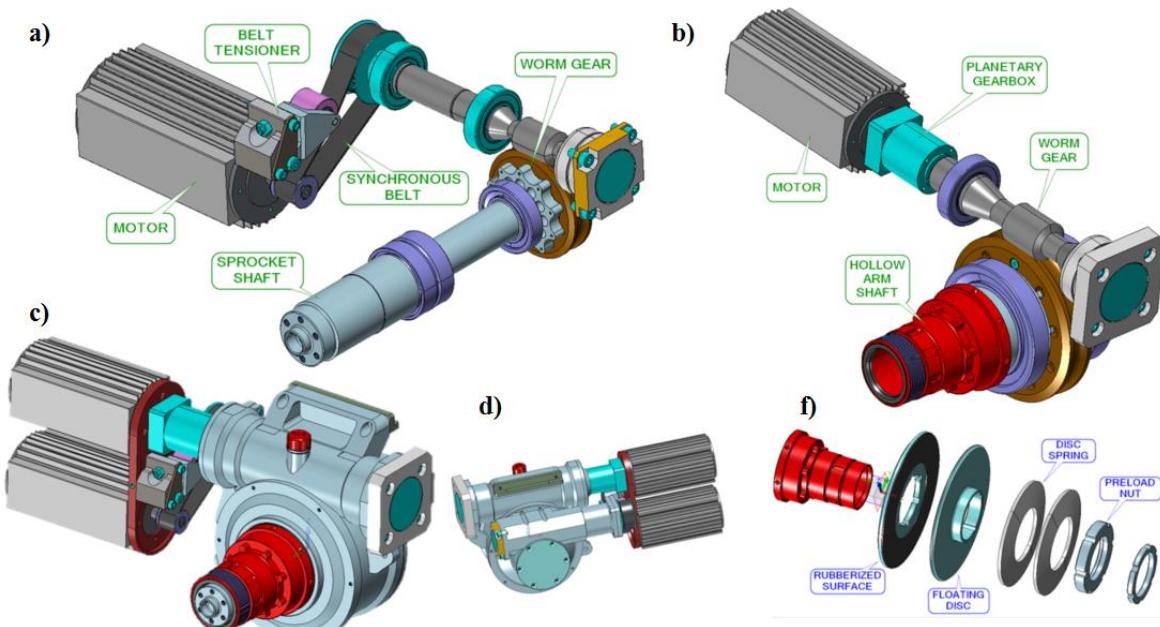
Drivetrain components – 3D model and assembled drivetrain units (one left, one right).
